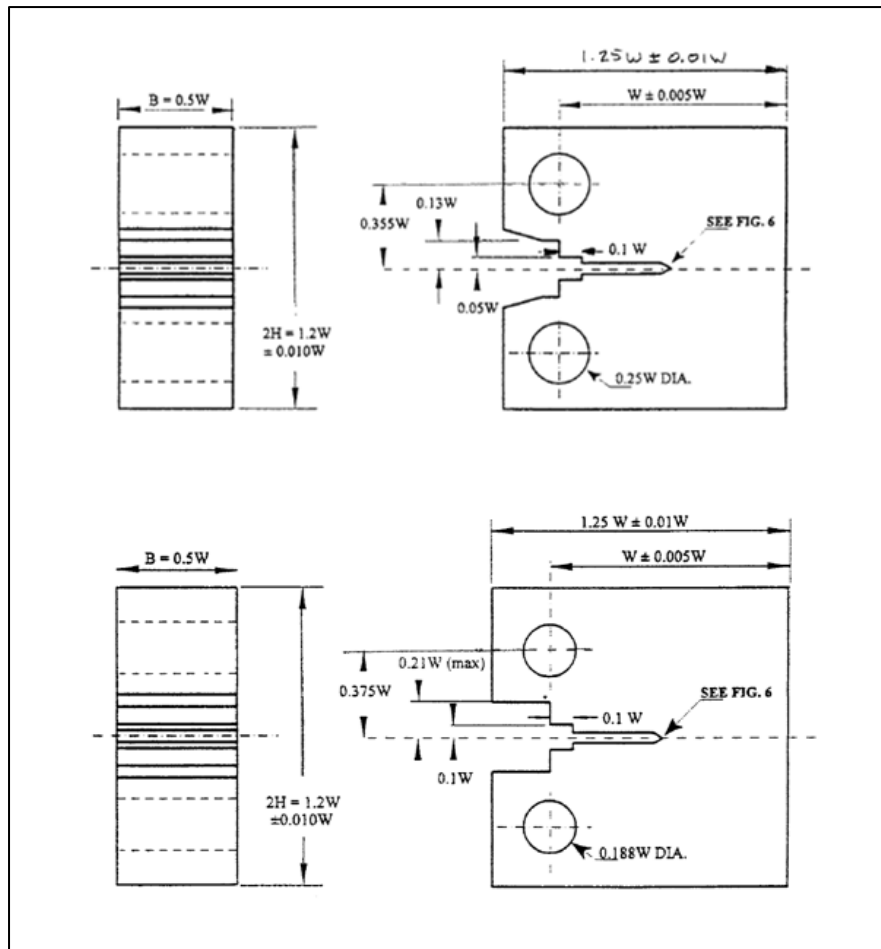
Two Common Designs of Compact Tension Specimen for Fracture Toughness Testing [19]
